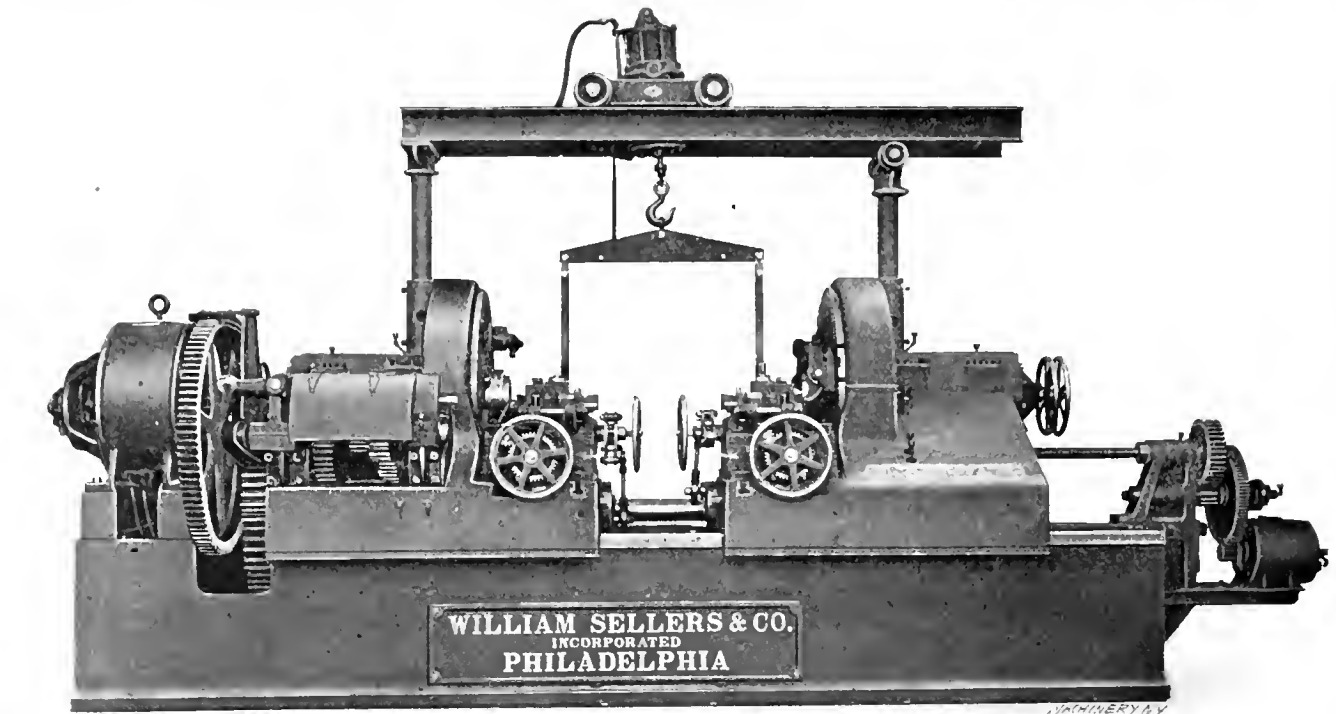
Sellers Car-wheel Lathe with Tool Turrets
